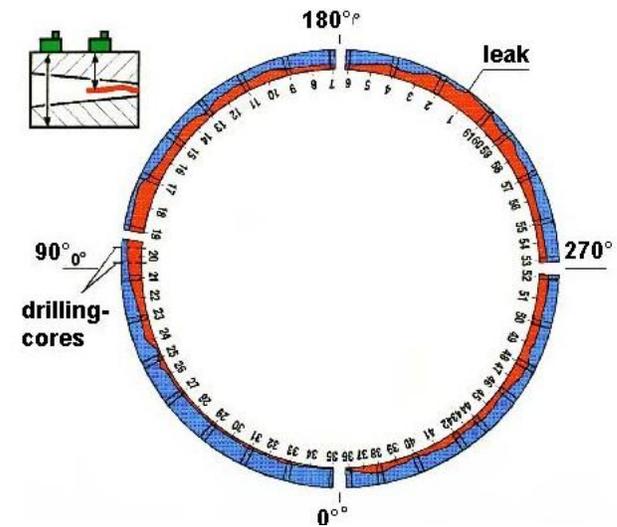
Converter C 702 – Crack Path and Partition of Cracked Welded Seam
